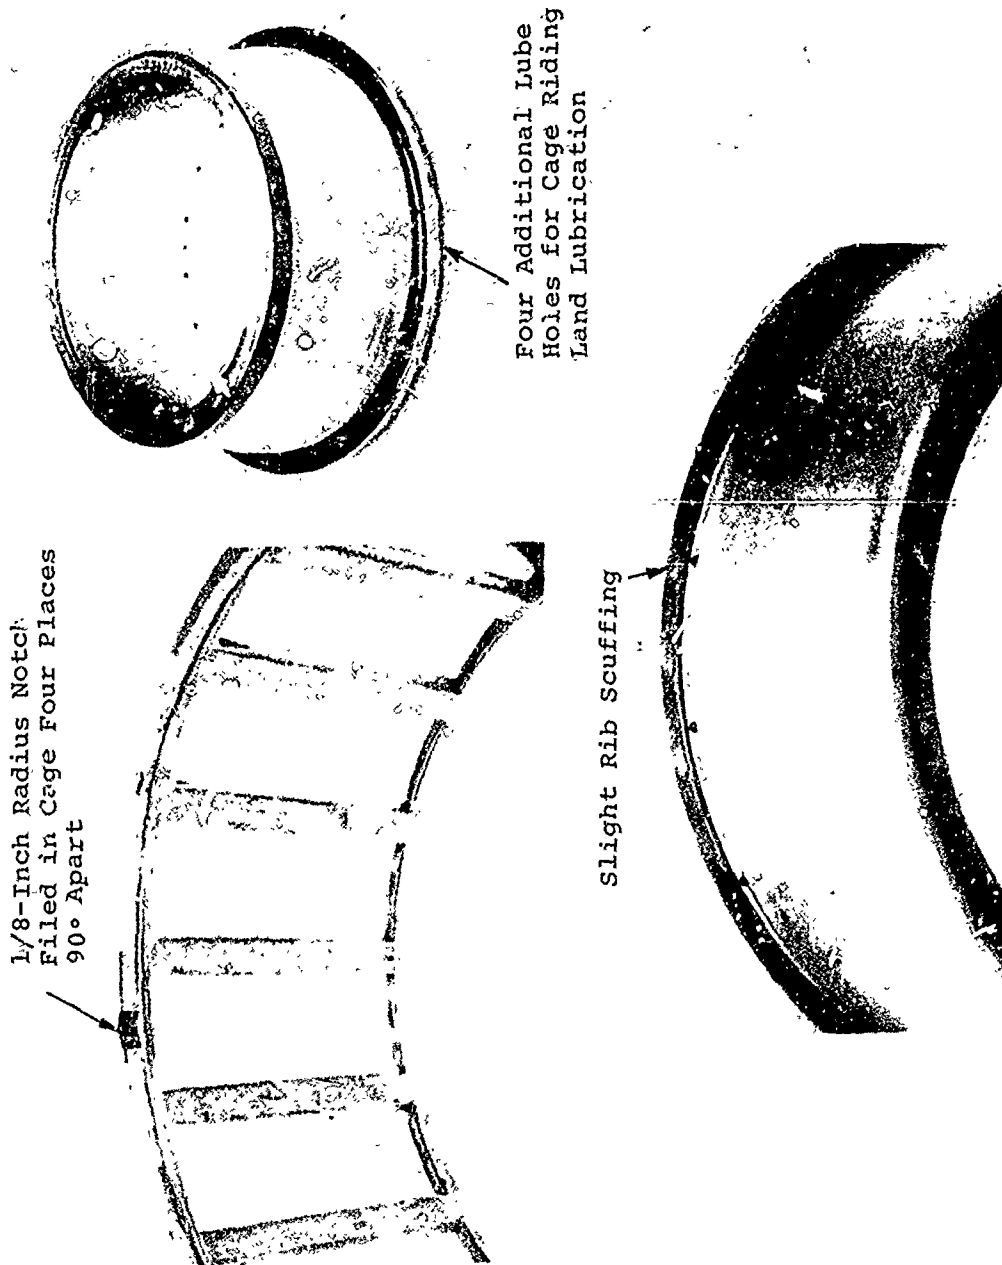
Bearing 83031-39 After Additional Fail-Safe Testing to Provide Lubrication to Cage Riding Land Surface.
